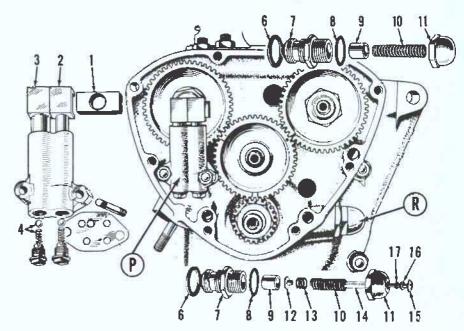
The oil pump is located at (P) and relief valve at (R). Exploded view of late type relief valve is shown at top and earlier type below.
